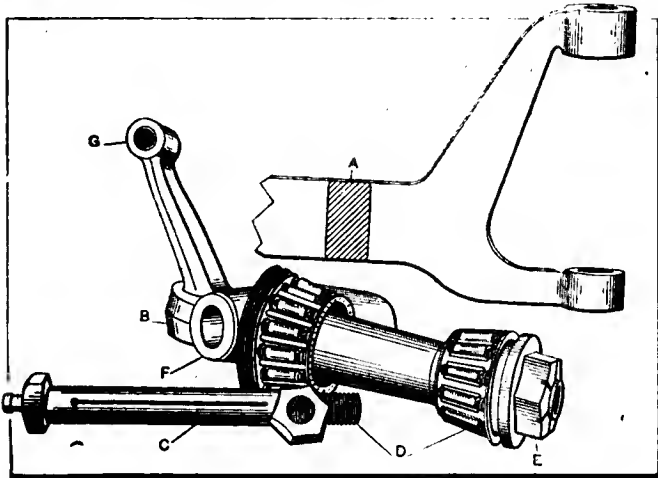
Knuckle end of front axle, knuckle, bearings and knuckle pin of special steel
